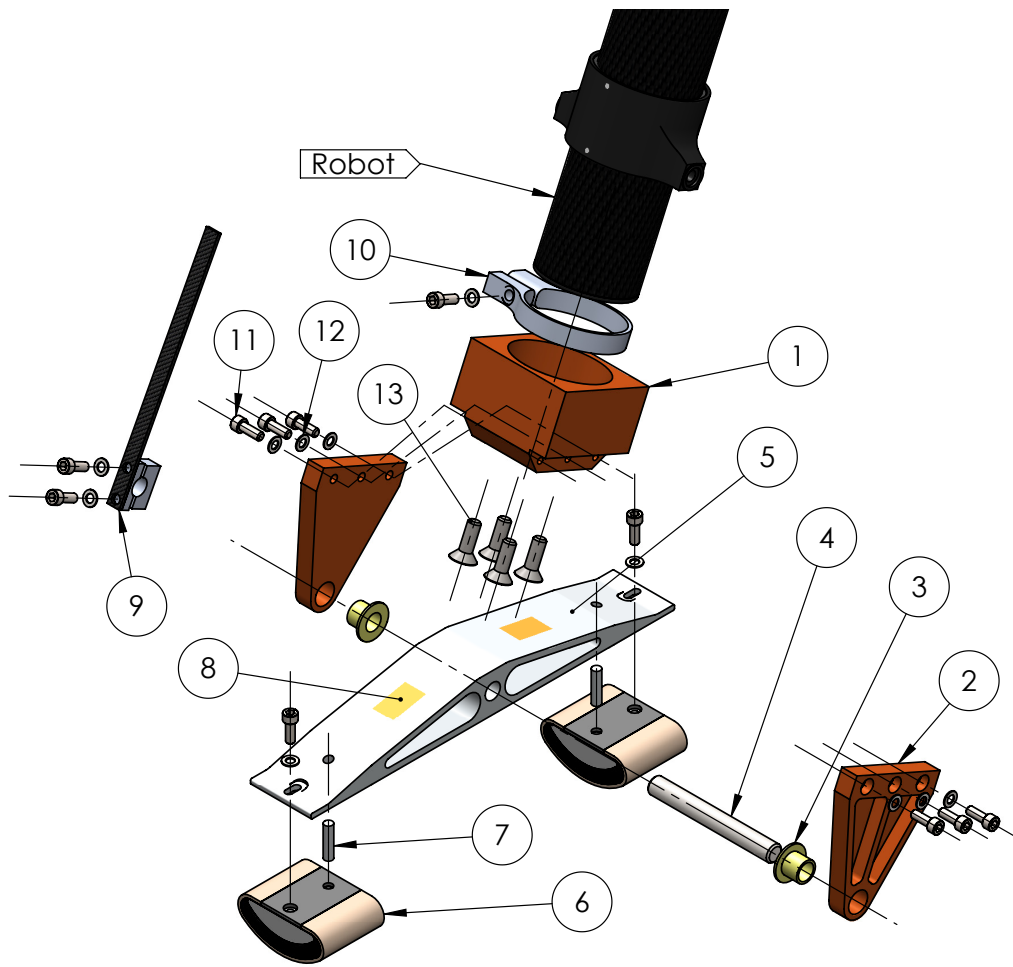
Exploded view of the foot prototype. Part numbers are associated with the bill of materials in Table 2
